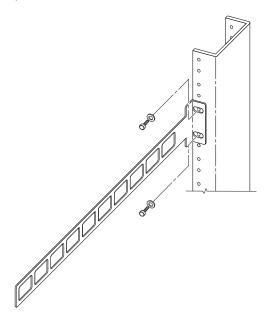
Attaching a Rear Mounting Bracket—Two-Post Rack Installation
